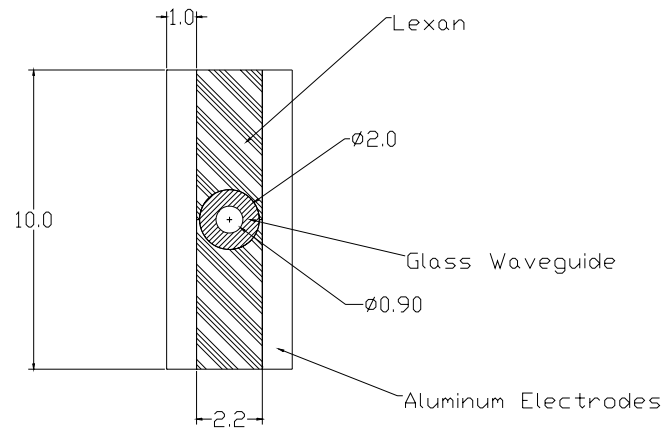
End view of 0.9-mm id glass modulator. All dimensions are in millimeters.
